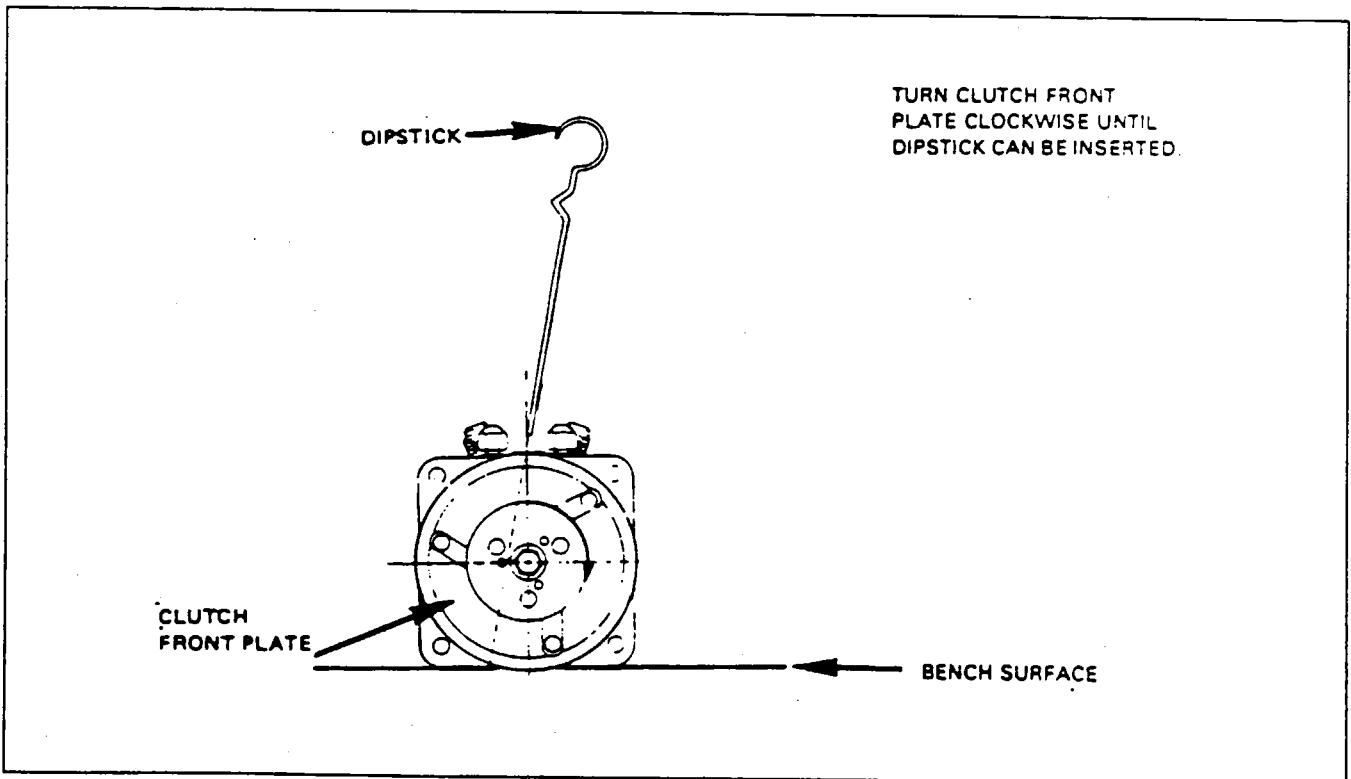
Rotation of Clutch Front Plate (Sankyo Compressor Oil Check)
